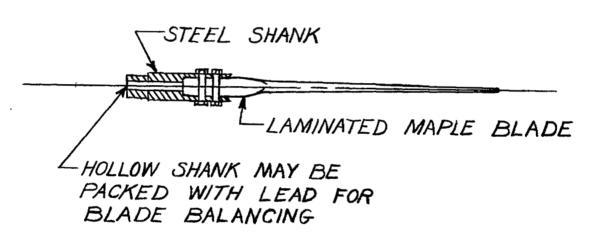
Modified blade and shank of the Koppers Aeromatic Impeller.
